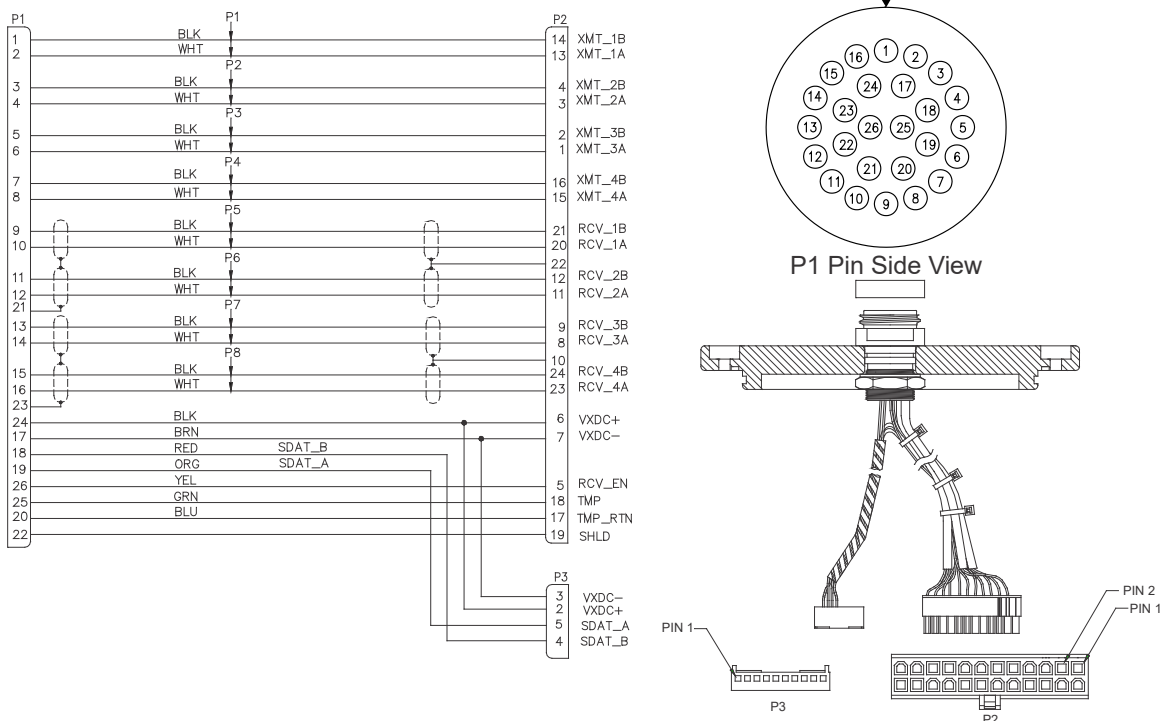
End-Cap Pin-Out and Internal I/O Cable Wiring
